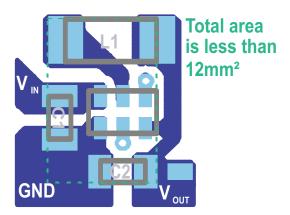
Recommended PCB Layout for TPS6223x-Q1
